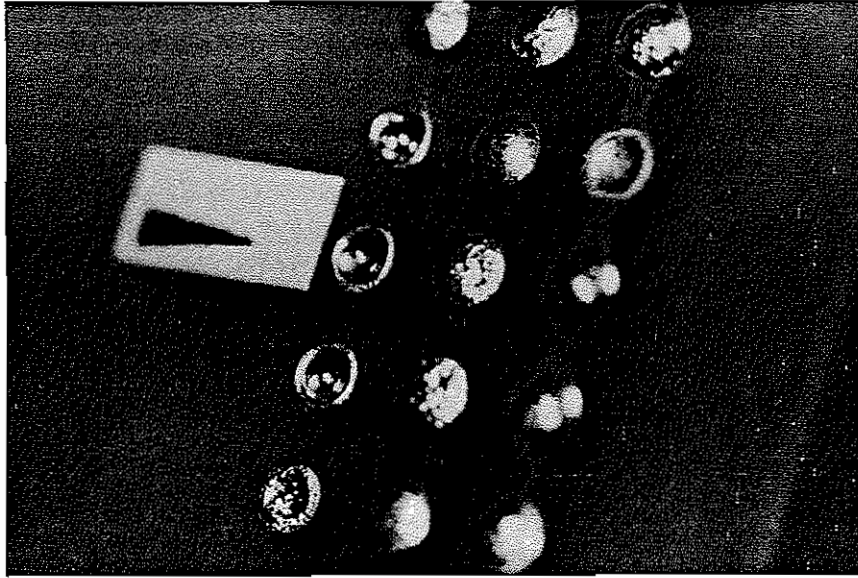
ROUGH SOLDER PADS ADJACENT TO PAD WITH SMOOTH SURFACE
